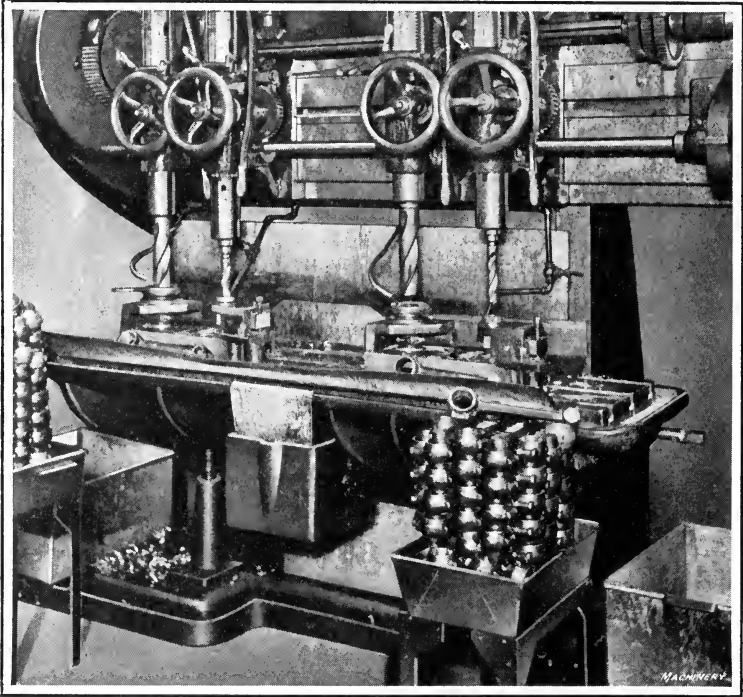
Four-spindle Drilling Machine engaged in simultaneously drilling Both Holes in Two Connecting-rods
